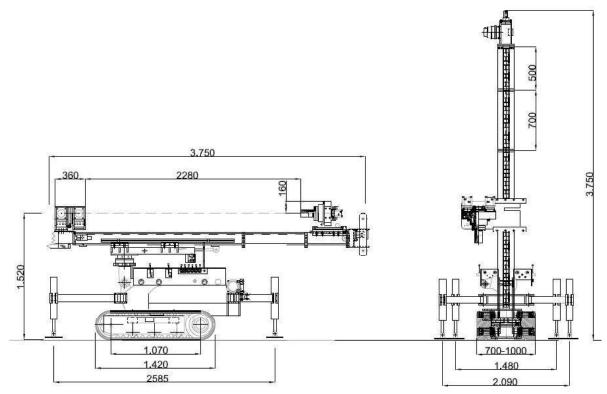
Rotary Drilling Rig Dimensions (in mm.)
